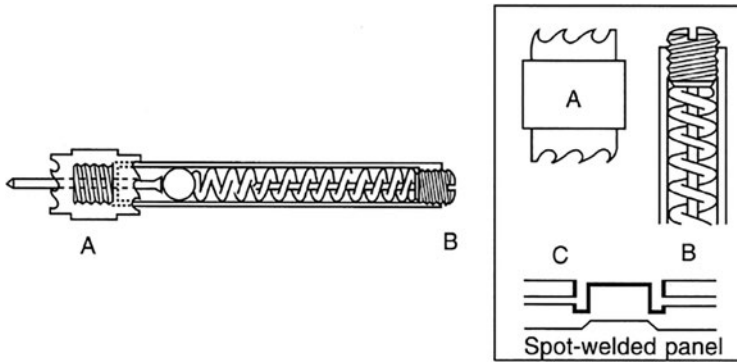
Zipcut spot-weld remover (Sykes-Pickavant Ltd)
